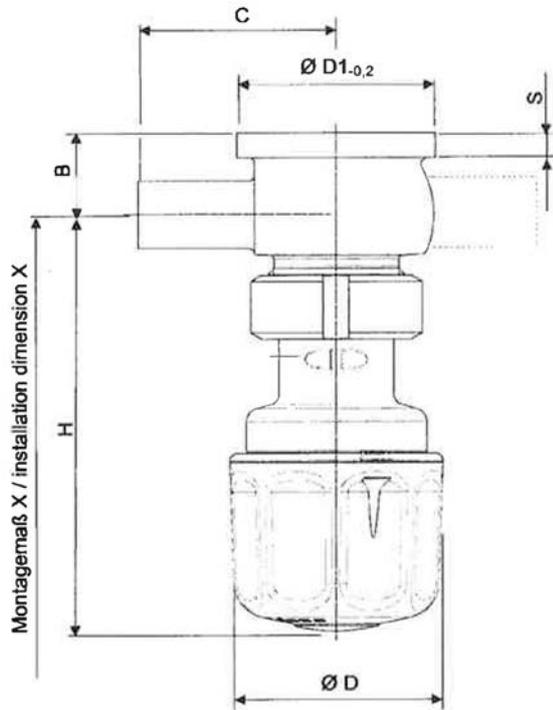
VESTA tank bottom valve H_A/T/H with housing for welding
